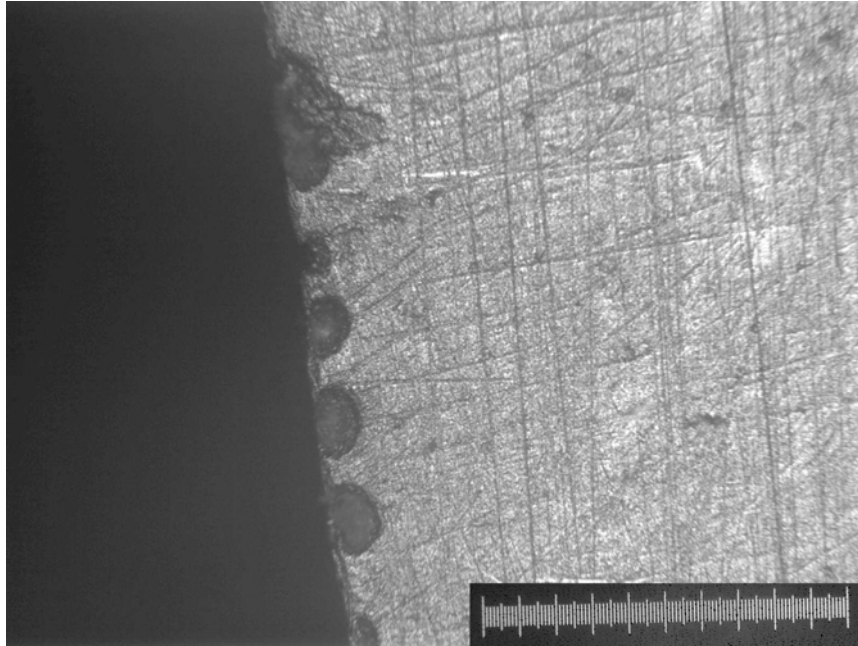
Microstructure of advanced machined process specimen#6 showing the defects caused by milling process at magnification 100x at location #3 on the surface
